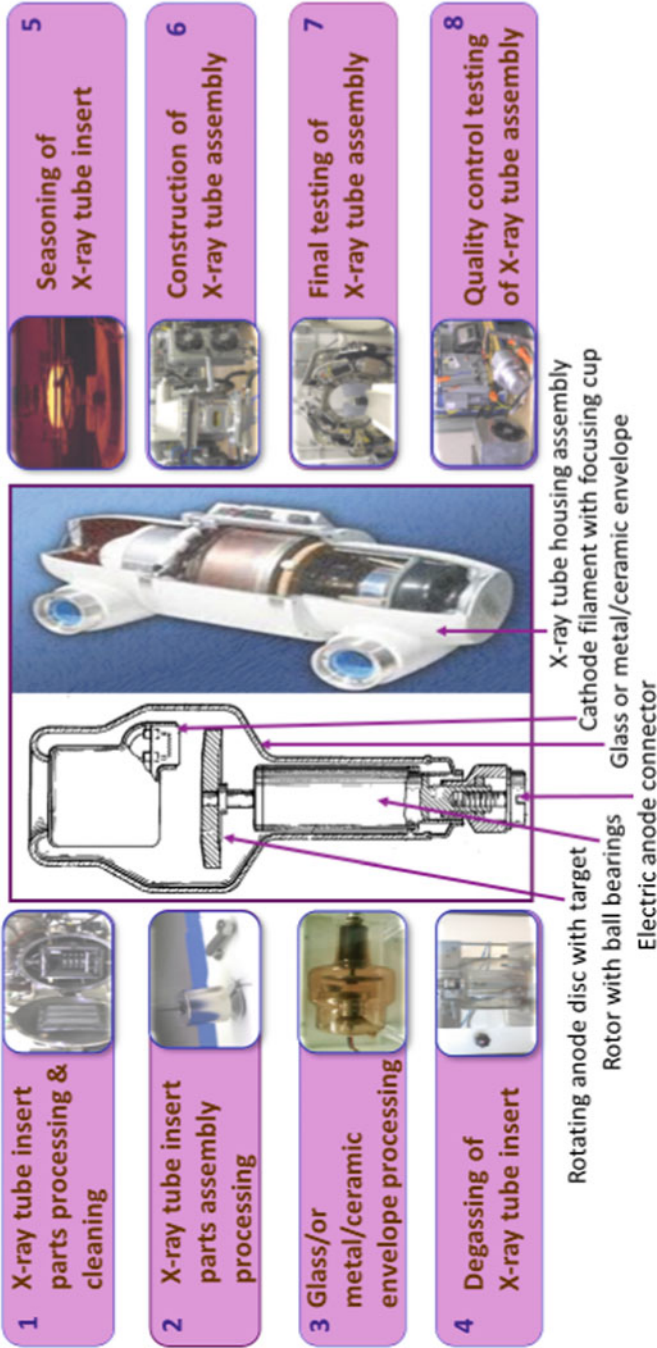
Block diagram of manufacturing processes of X-ray tube assembly
